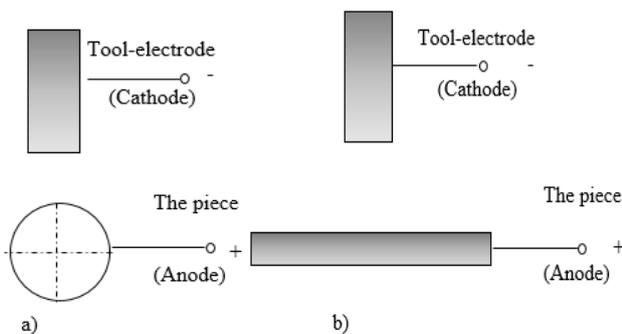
Schemes of electrode positioning used in the experimental investigations and their connection in the circuit of power impulse generator discharge: a) the case of cylindrical piece; b) the case of flat piece.
